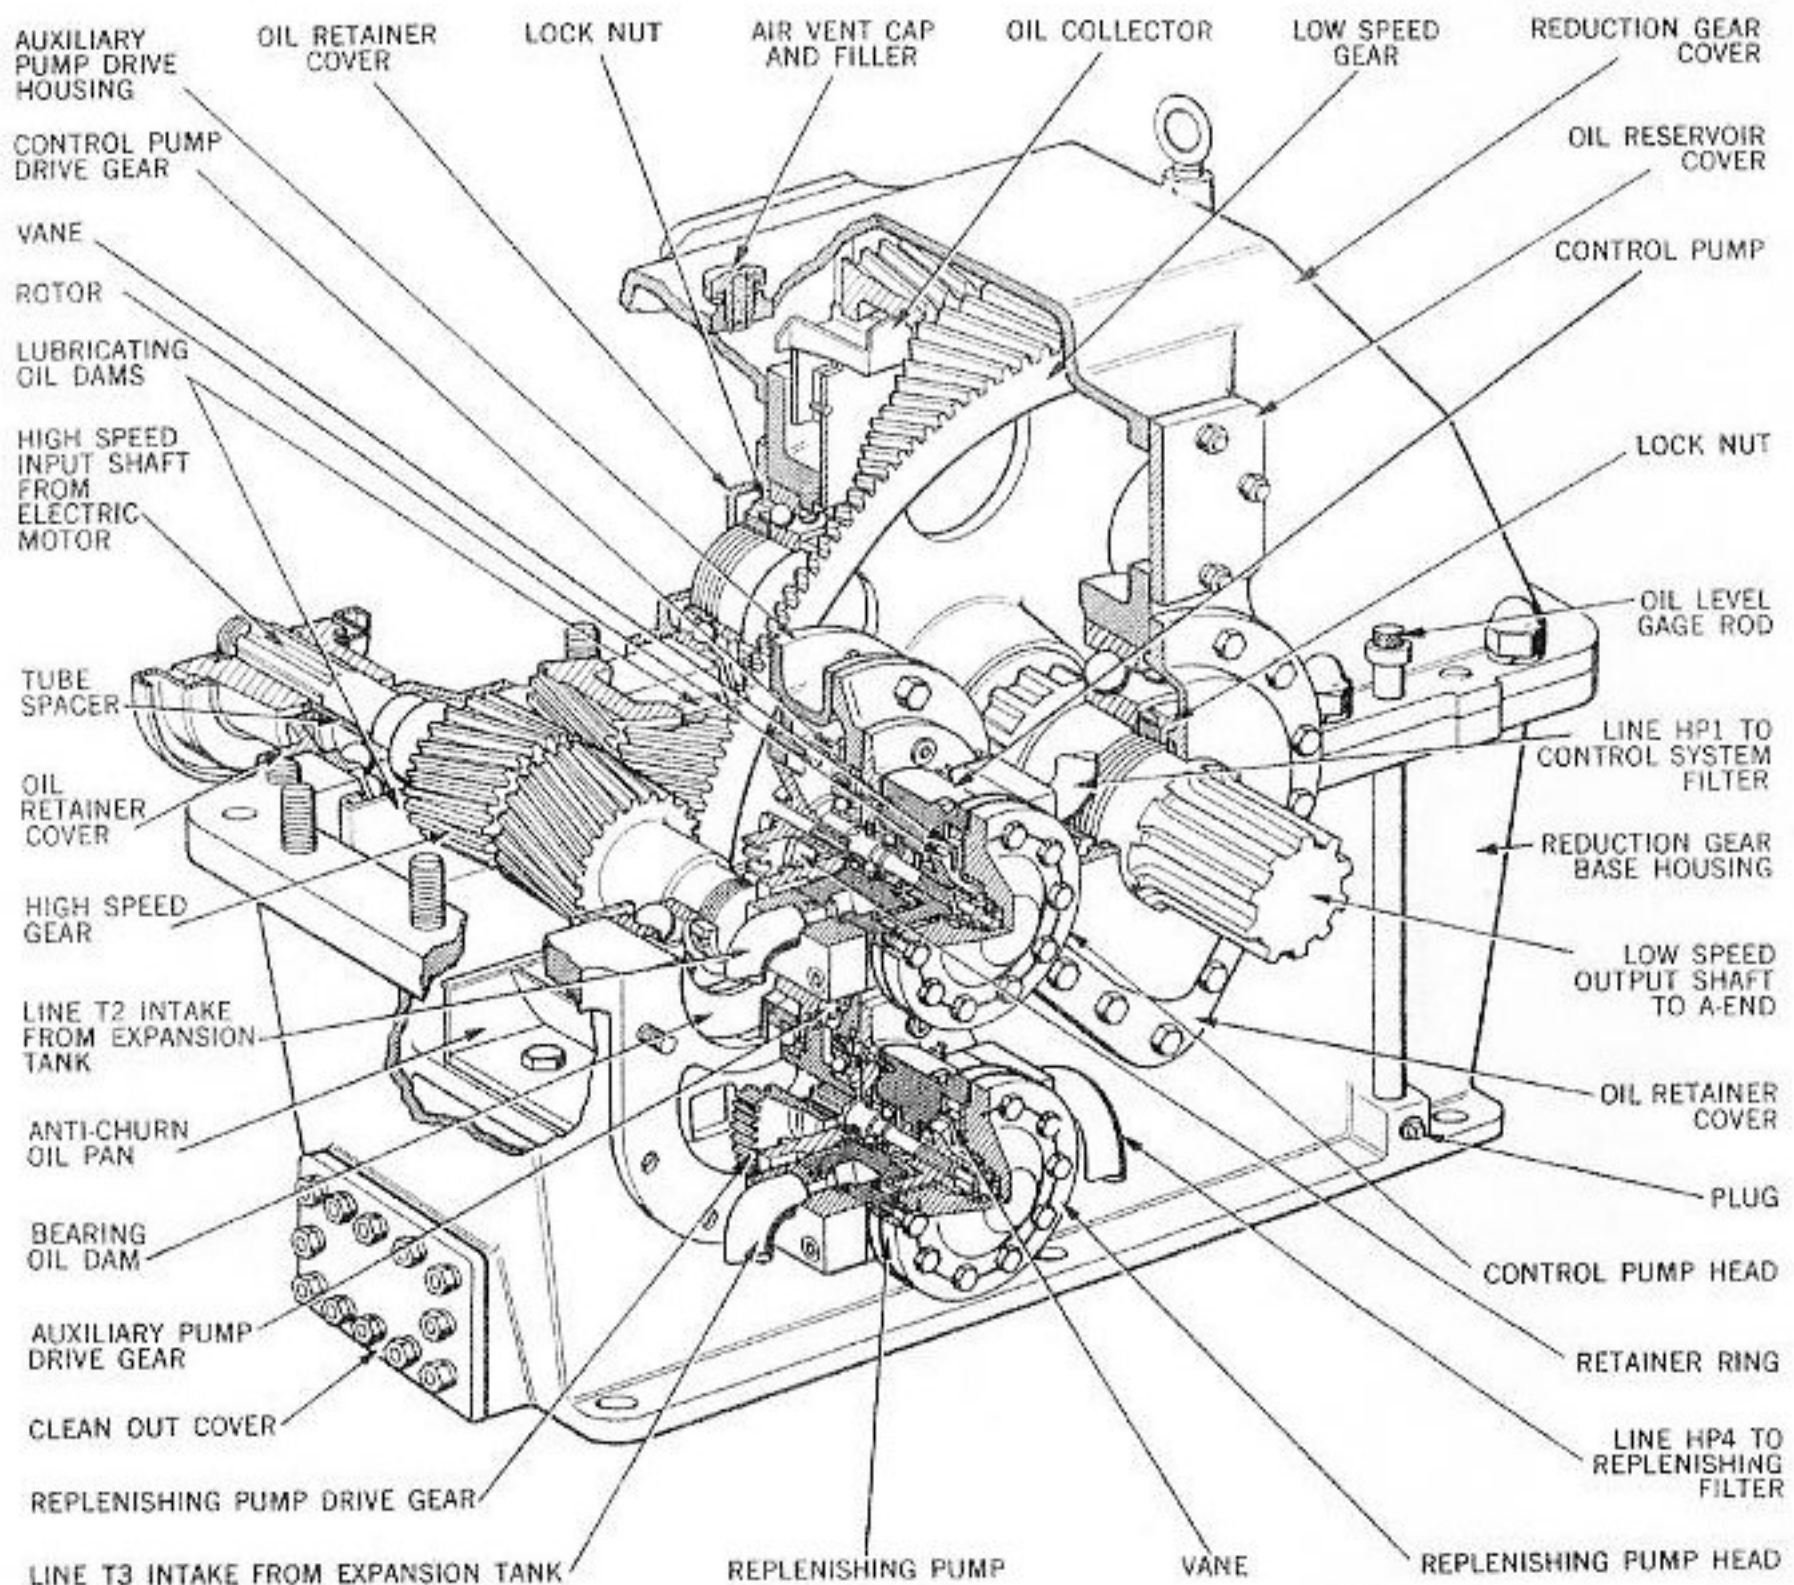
Training Gear Reduction Gear and Replenishing Pump Assembly, Cutaway View
